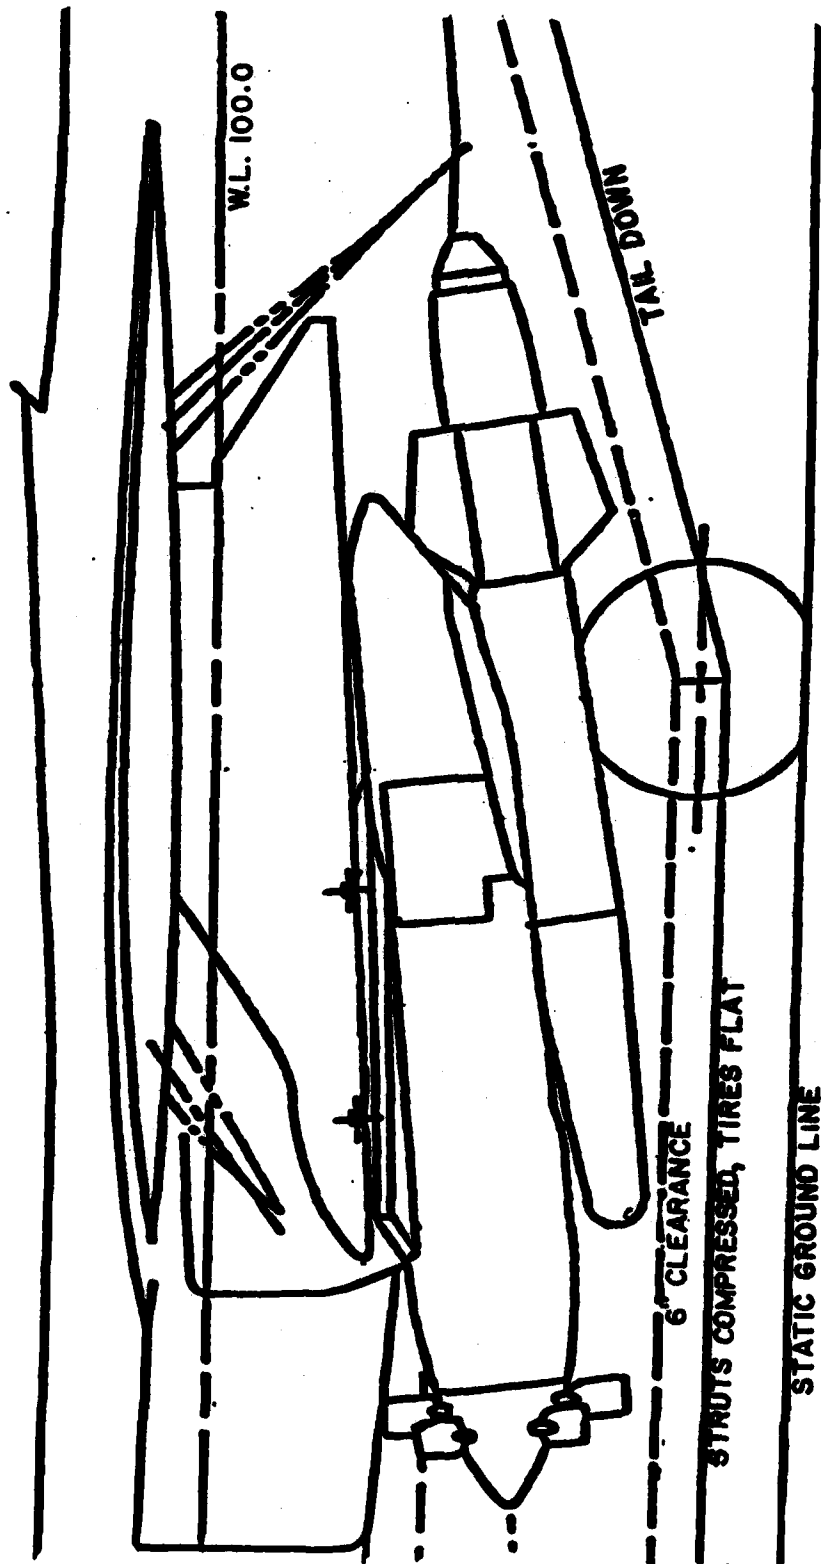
F-18 NSTTS INSTALLATION, SIDE VIEW
